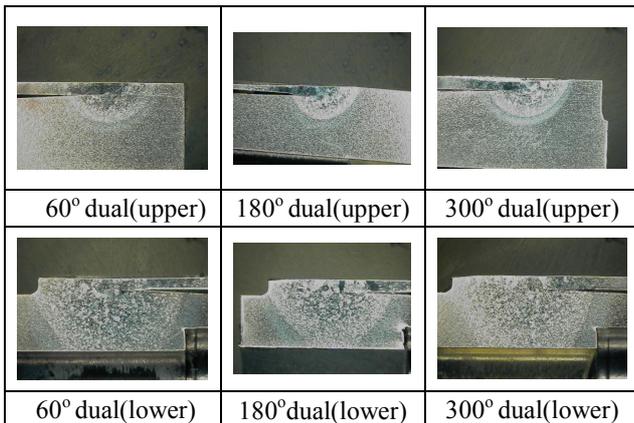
Macro-sections of the upper and lower sides with dual rod specimens.
